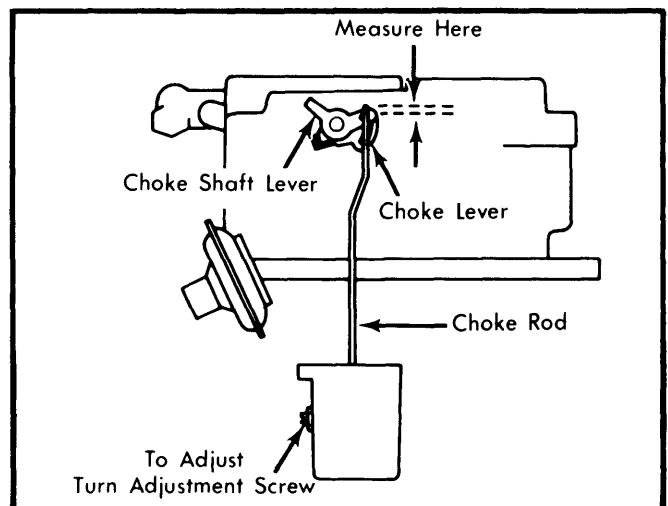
Adjusting Automatic Choke (International Harvester Models)
